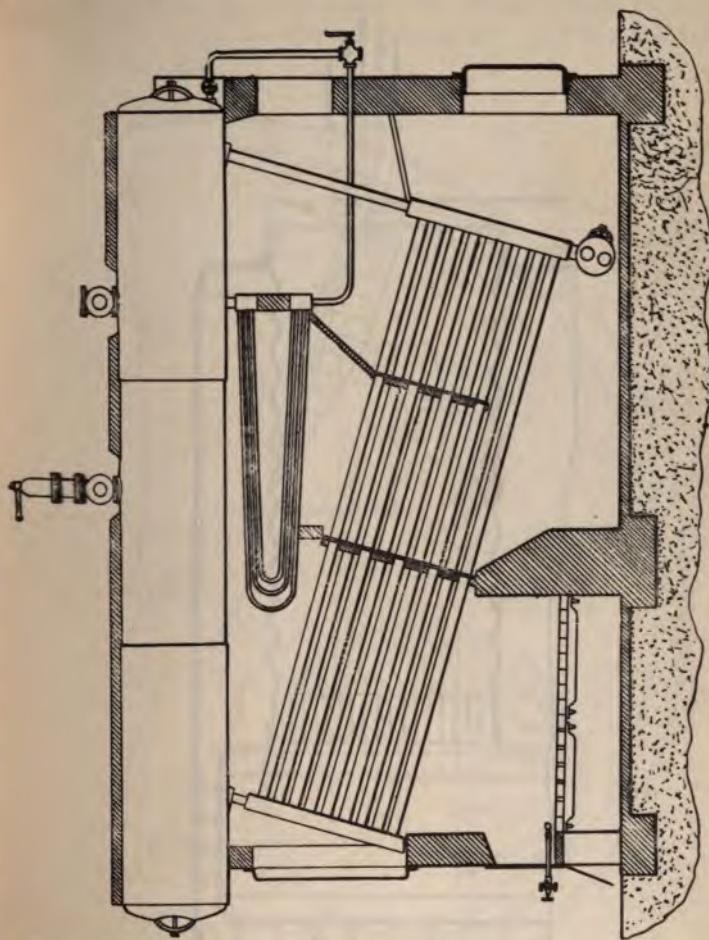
S. & P. Furnace Arrangement Under B. & W. Boiler
